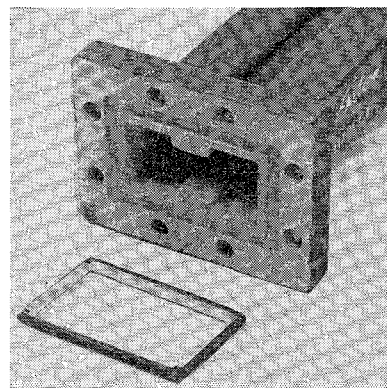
Pressurized contact flange for double-ridge guide with rf and air gasket.
